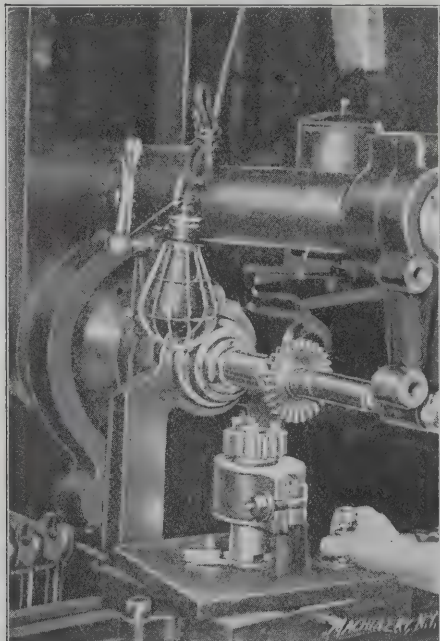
Milling Clutch Teeth in Gear-clutch End of a Drive-gear Sleeve
